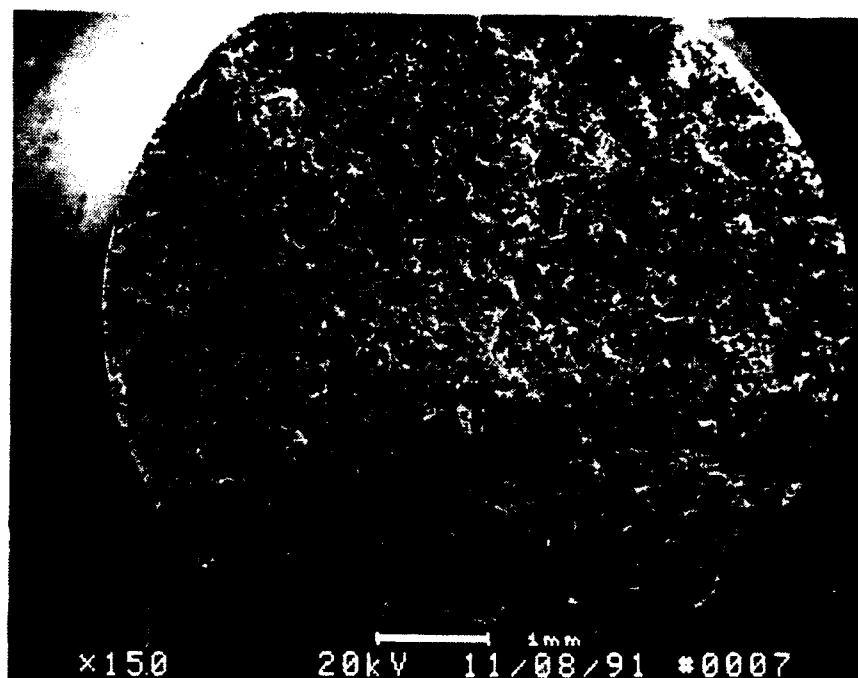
SEM fractograph of the ductile iron tensile specimen showing minor secondary cracks in the matrix.
